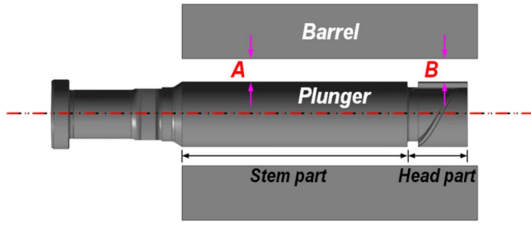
Dimensionless clearance of stem part (A) and head part (B) [1, 4].
